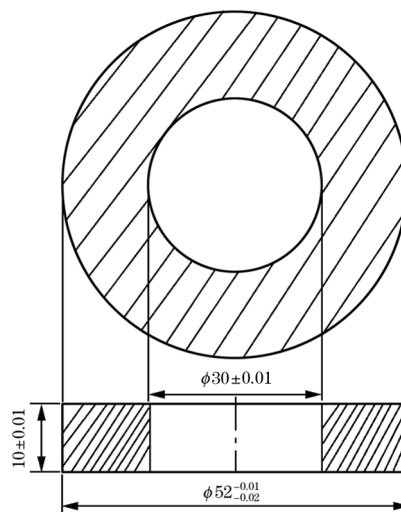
Dimensions of specimens for rolling contact fatigue tests (unit: mm)
